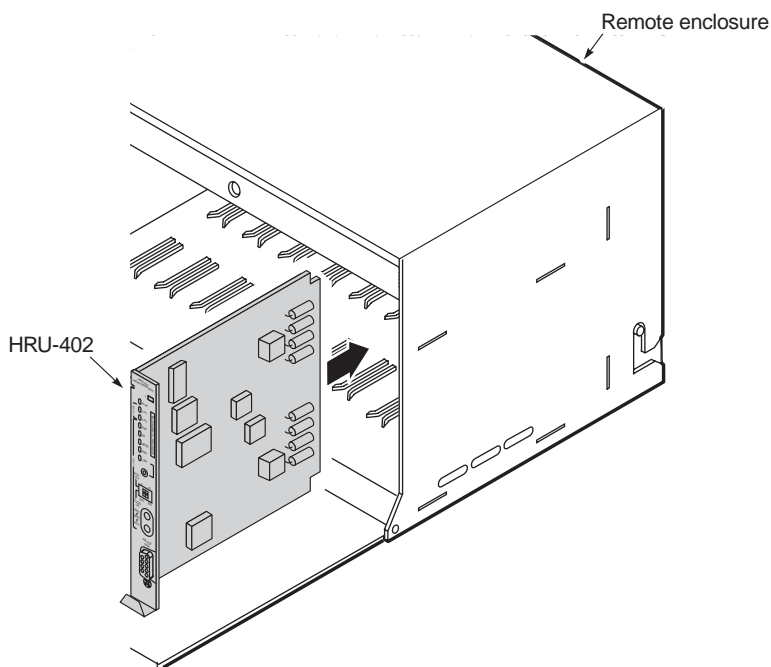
Installing the HRU-402 in a Remote Enclosure
